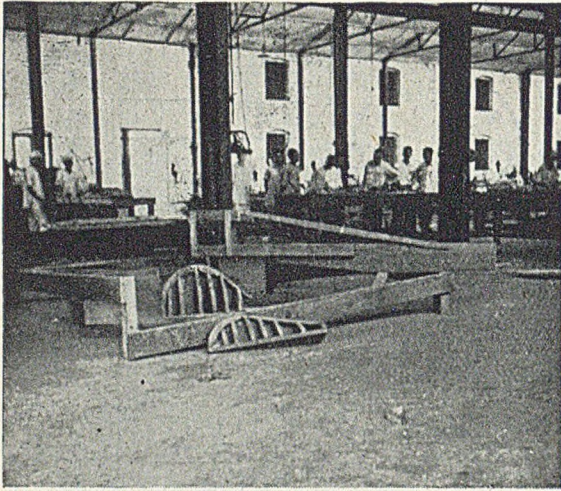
PATTERNS USED FOR MAKING THE METAL PATTERN FOR THE PILE SCREW CASTING.
